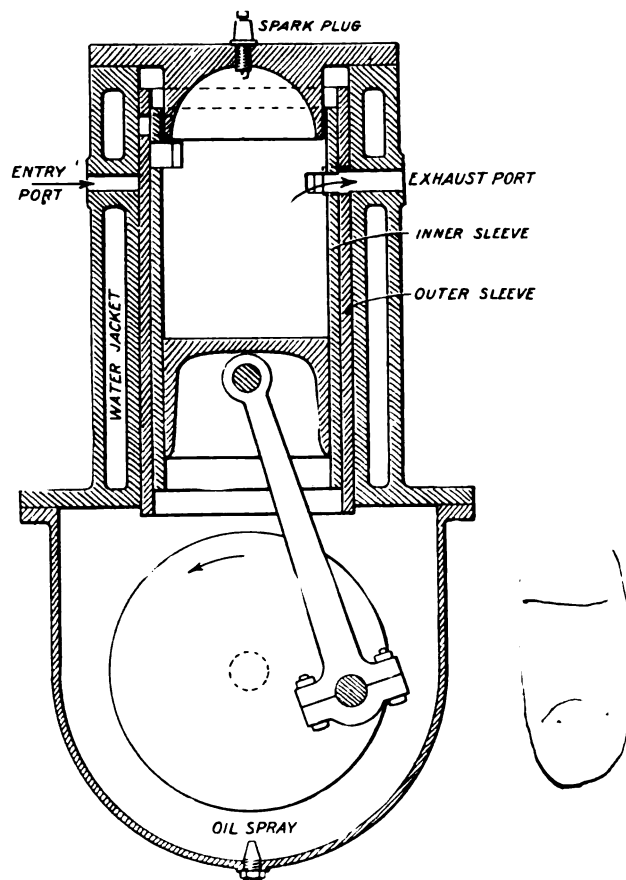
Sectional view of engine cylinder, crank and slide valves.
